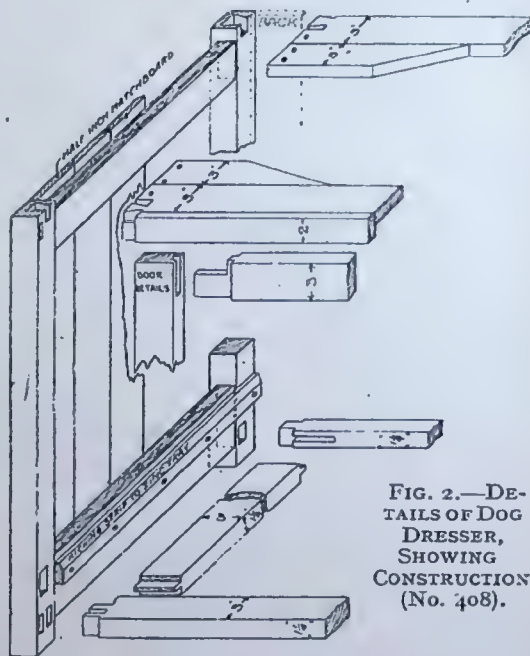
DETAILS OF DOG DRESSER, SHOWING CONSTRUCTION (No. 408).
